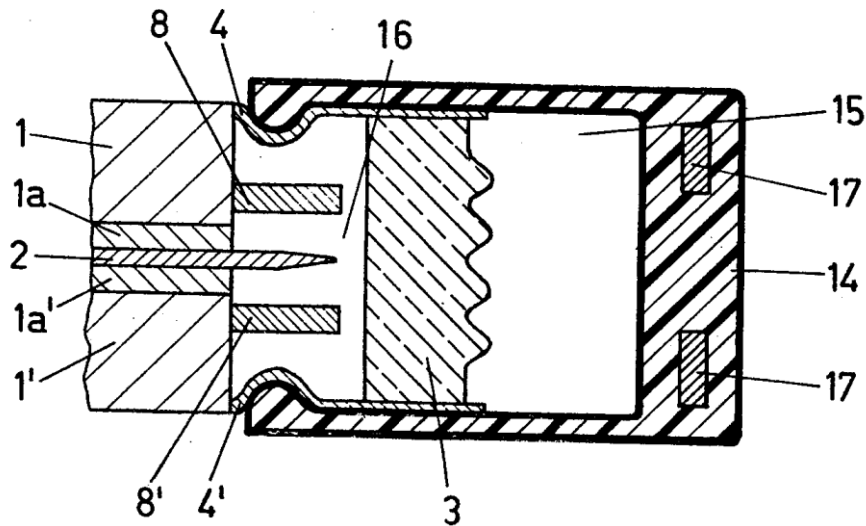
Explosion guard housing (De Bruyne et al., 1979)
